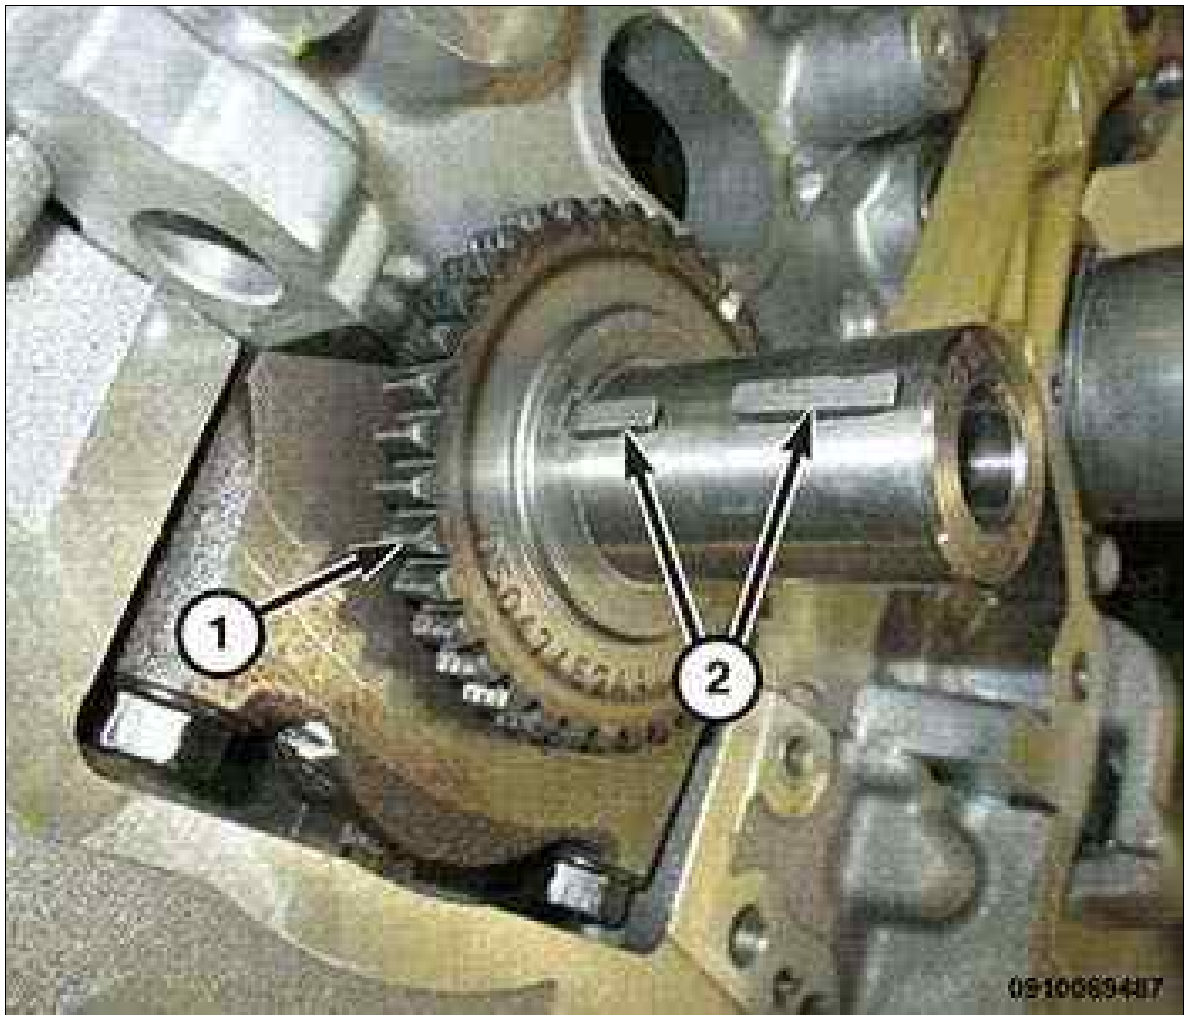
Oil Pump Assembly - Balancing Assembly & Bolts
